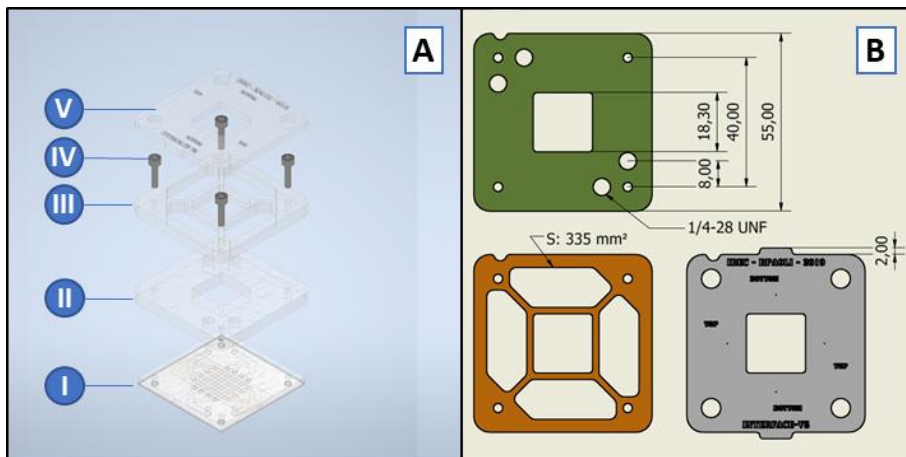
OOC Design v2.1. A) Exploded view of the assembly: I) OOC v2.0 device; II) ¼-28 threaded connectors layer (PMMA); III) Media reservoirs layer (PMMA); IV) Metric Socket head screws; V) Top lid (PMMA) used to close the reservoirs; B) Main dimensions of the added layers in OOC v2.1.
